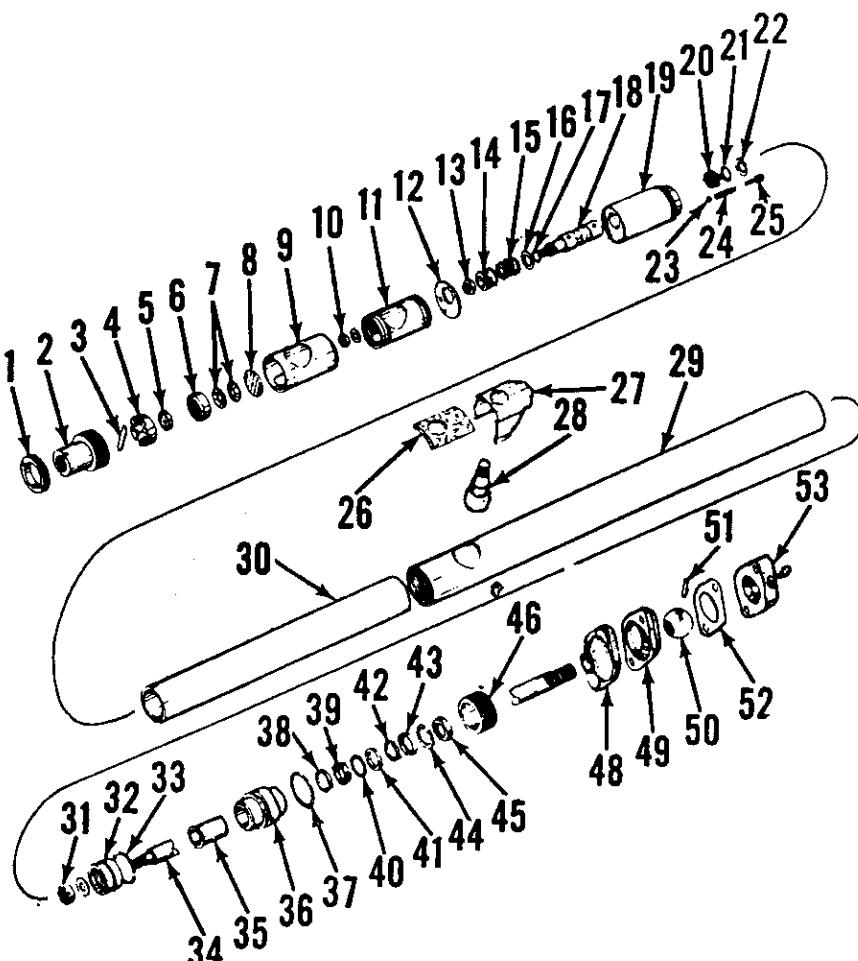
Exploded view of Series B-414, 354, 364 and 384 power steering cylinder and valve assembly. Refer to Fig. 12 for view of connecting link which fits into take-off extension (2).
